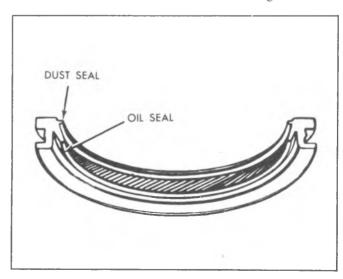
A-65V--Crankshaft Oil Seal - Rear Main
